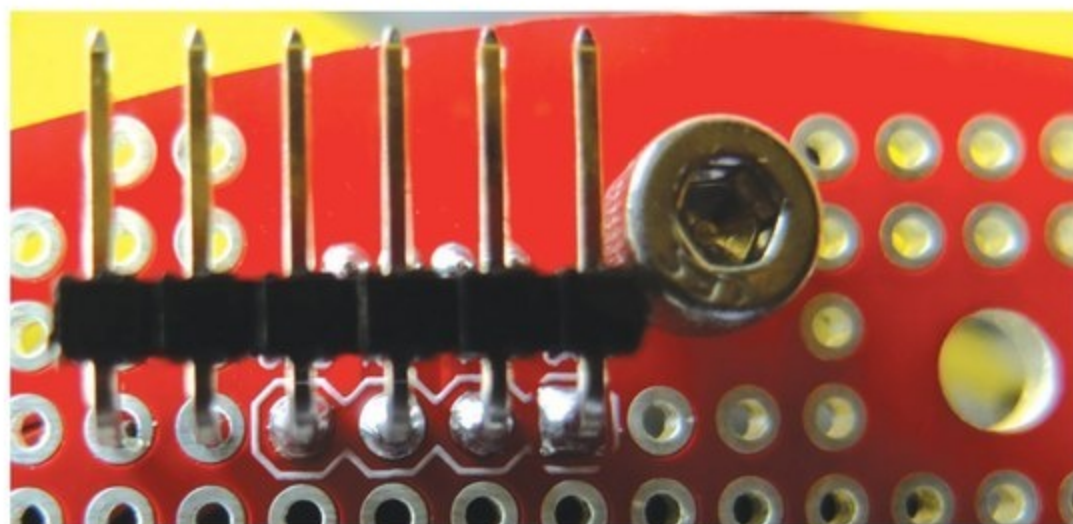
Solder a right angle-header to the expansion socket's pads on the Proto-Back. I used a six-pin header to allow me a couple of extra connections for a future project.
